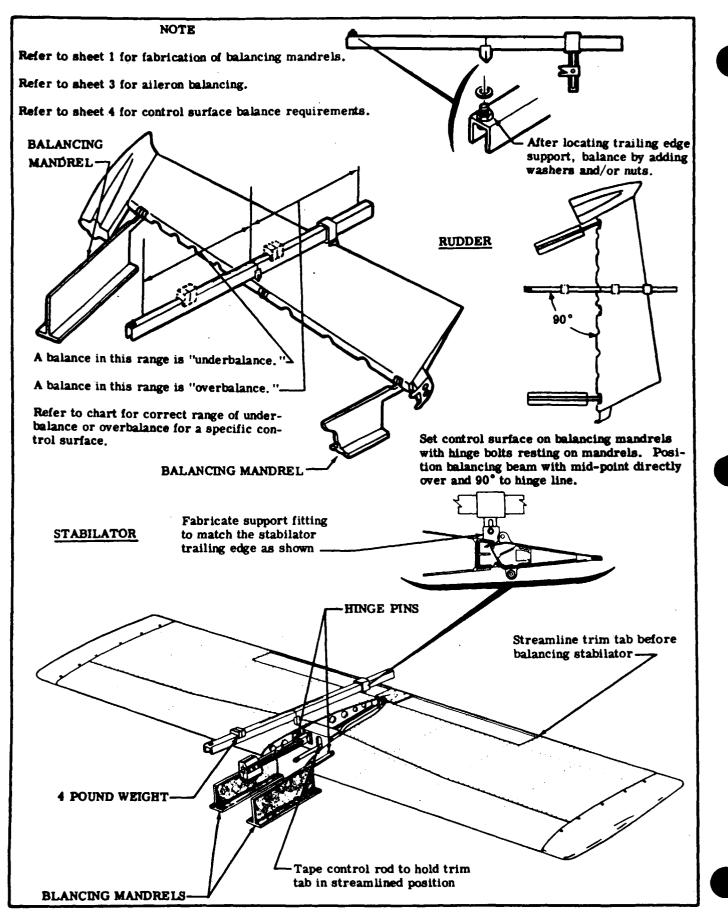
Control Surface Balancing (Sheet 2 of 4)
